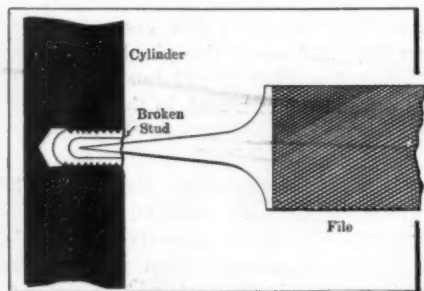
Method of extracting a broken stud holding the manifold to the cylinders by drilling a hole and using a file
